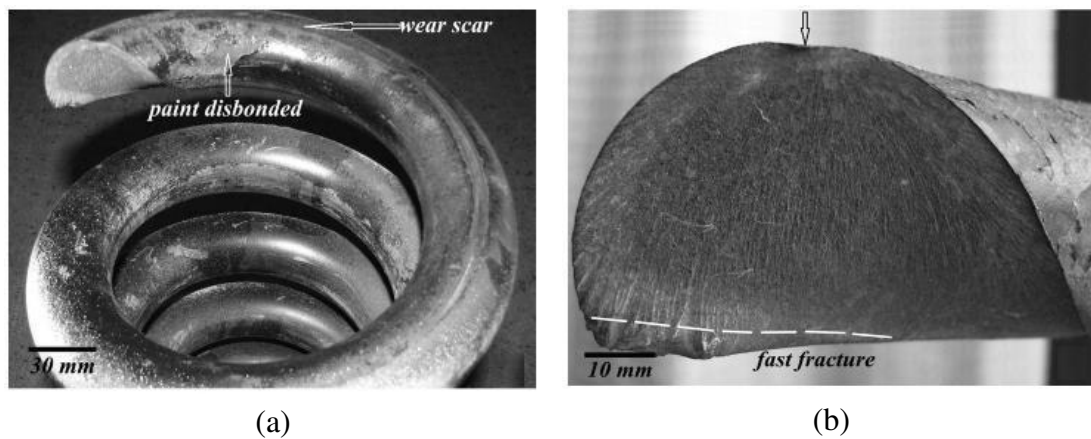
Photograph of a failed coil spring: (a) fracture surface, (b) magnified image of the fracture surface
